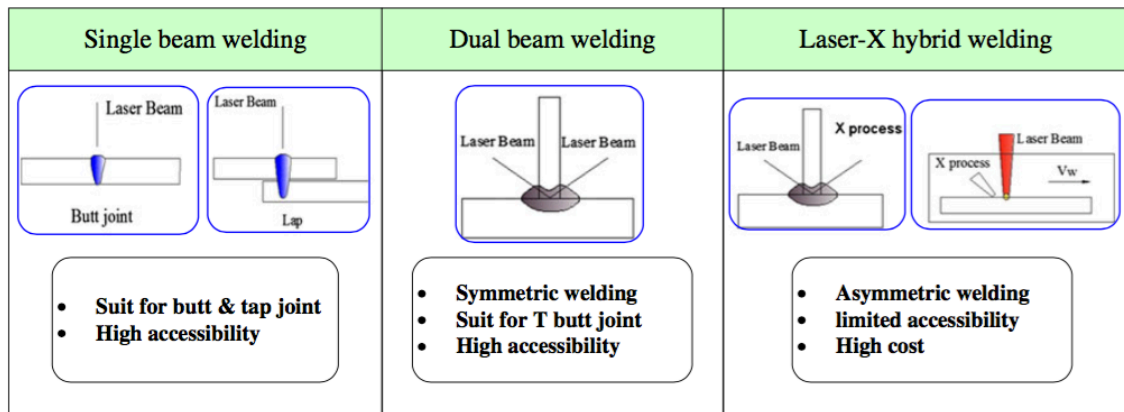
Schematic representation of single beam welding, dual beam welding and Laser-X hybrid welding (X is a different arc based welding method) (11)
